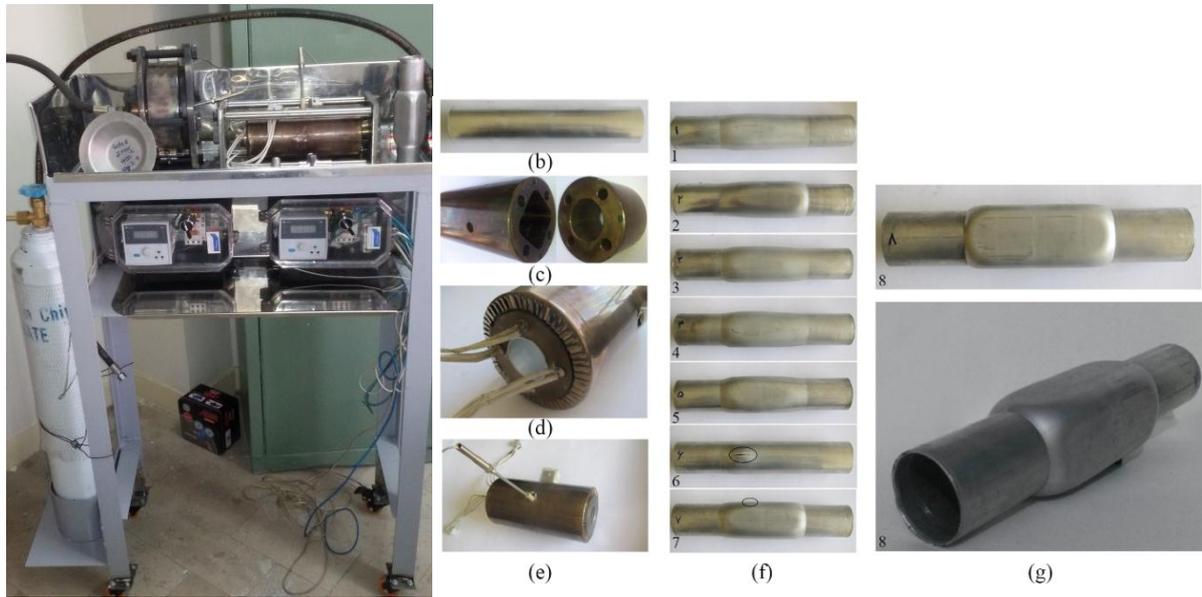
Experimental setup (a) constructed setup (b) unformed tube (c) die (d) die and heaters (e) temperature sensor location (f) unsuccessful forming attempts (g) satisfactory forming.
